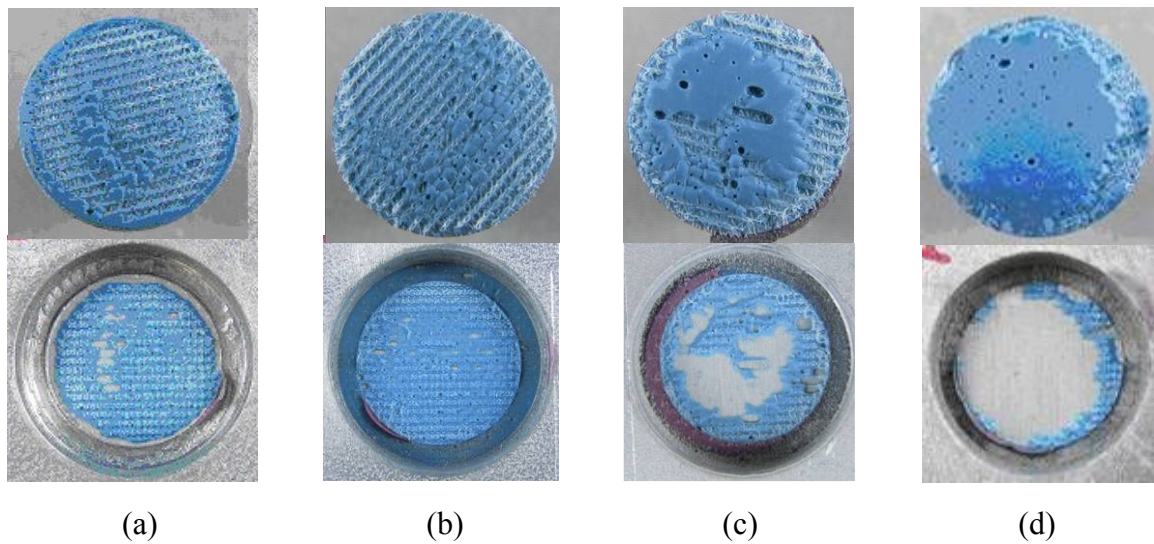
Typical fracture surfaces on the stub-side and panel side of the (a) 3.0 mm uniform section and (b) 1.7 mm (c) 1.3 mm (d) 0.7mm tapered sections of the bonded tapered panel after PATTI testing. The left-hand side of the fracture surfaces shown in the bottom row correspond to the ‘thin’ region of the tapered panels.
